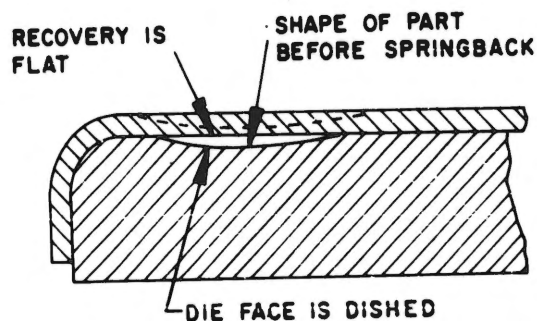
A Typical Method of Attaining Flat Surfaces in Rubber Forming
